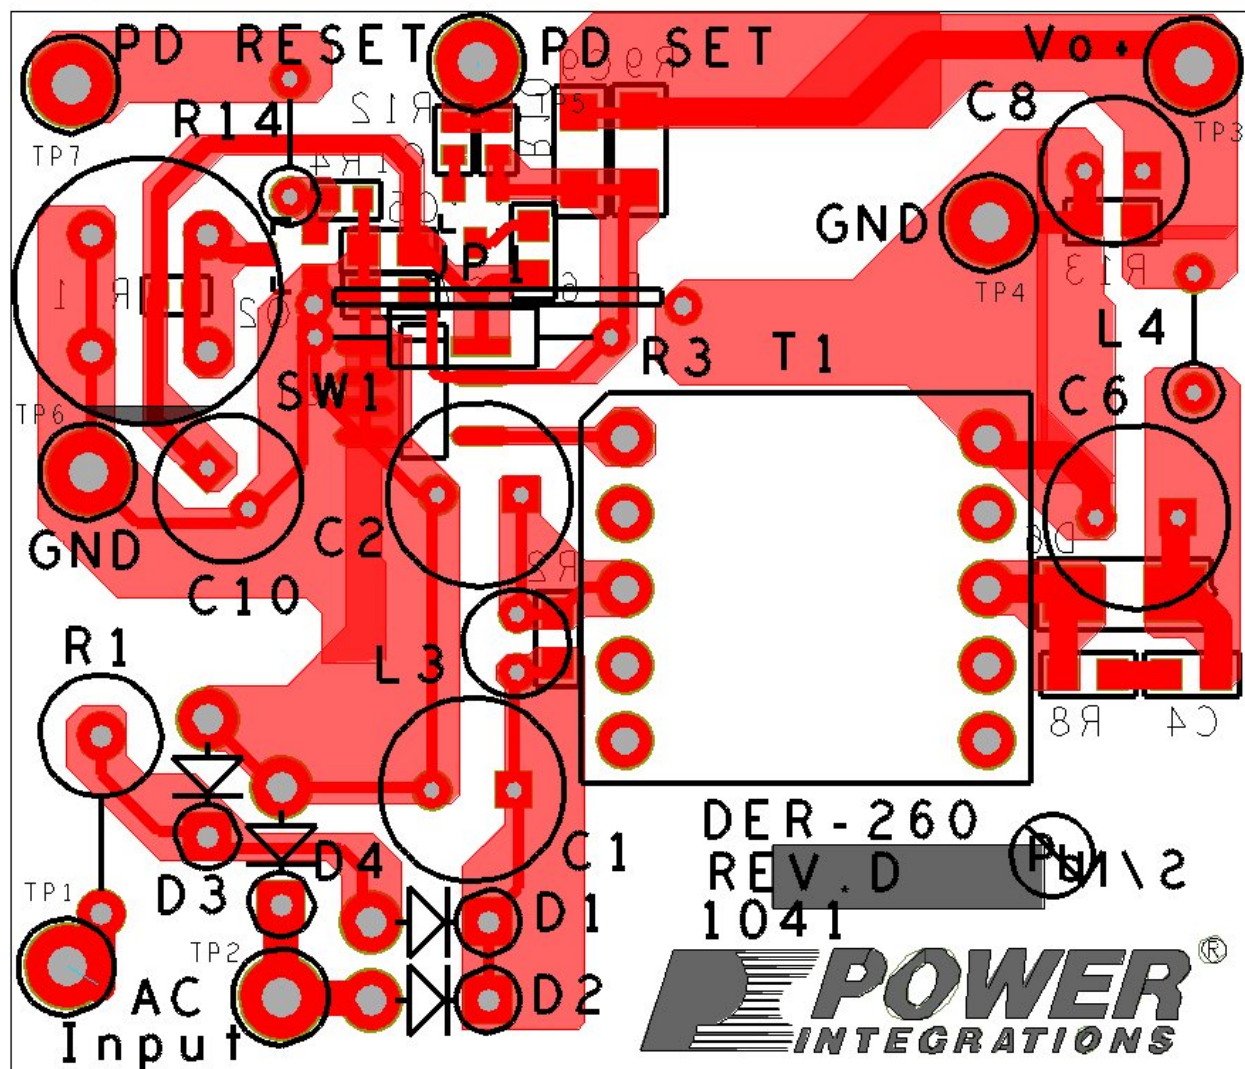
PCB Layout 2.10" (53.3 mm) x 1.81" (46.1 mm)
